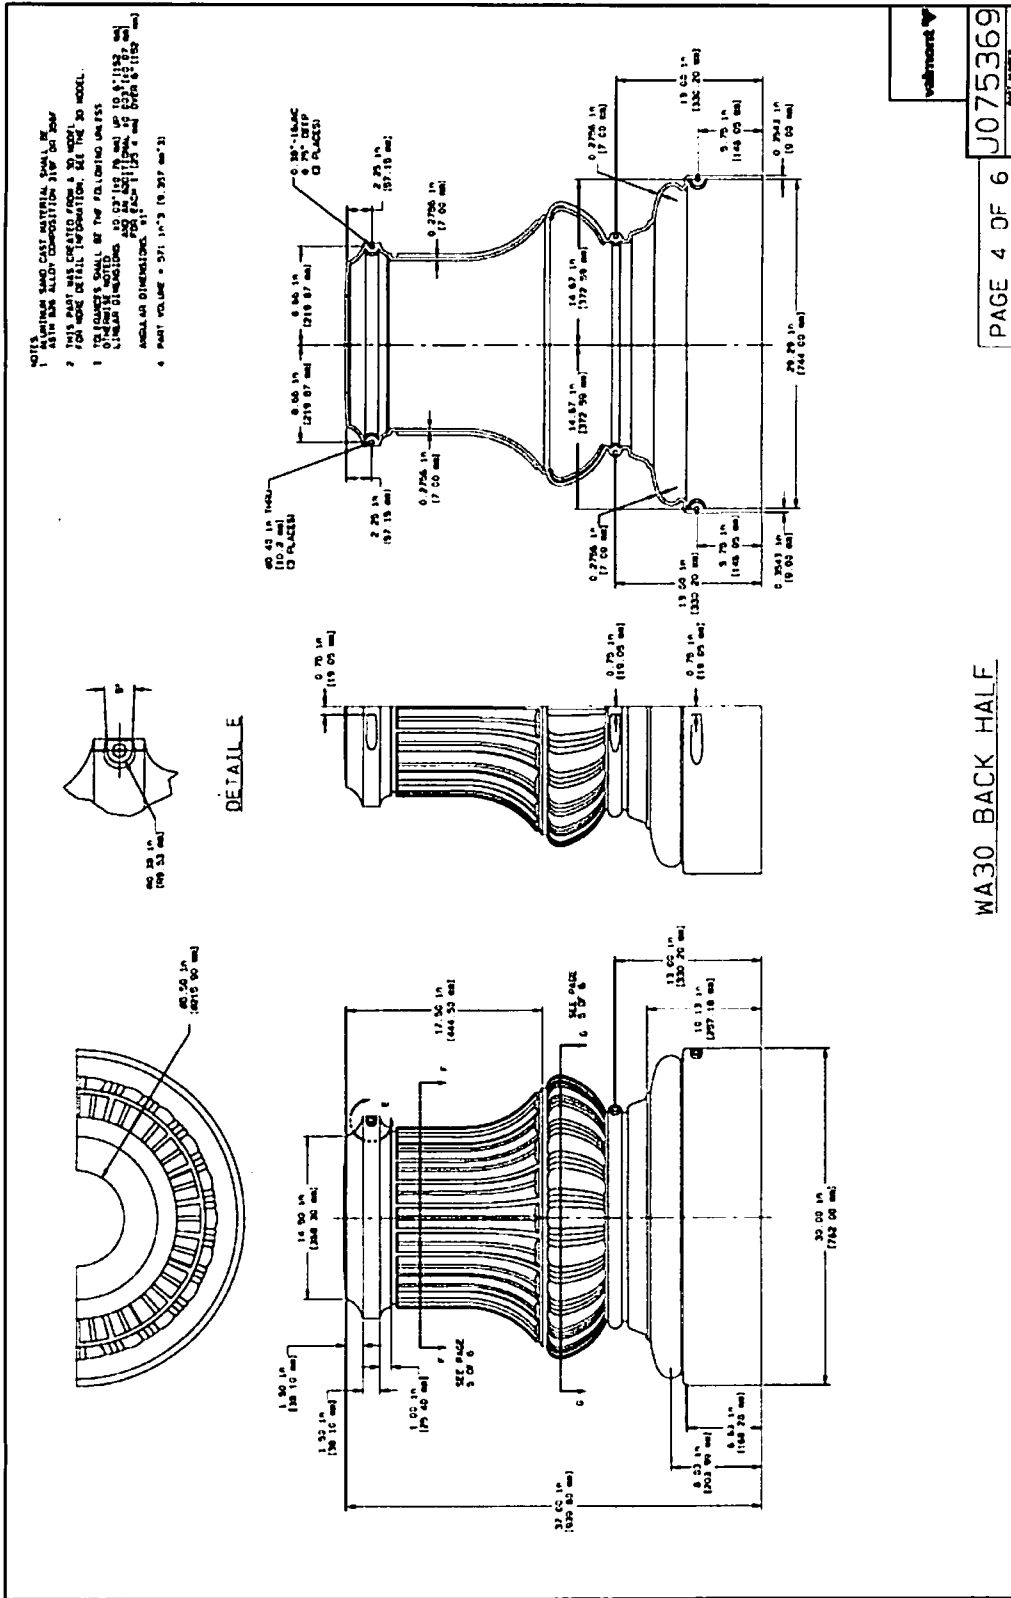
Washington-30 Clamshell Base Details, Test No. LST-353-05
